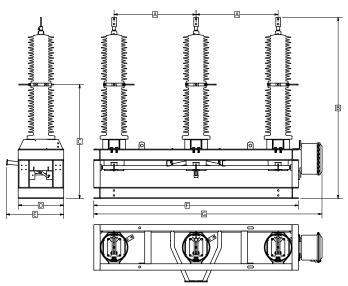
, 7, 8. Dimensions of TriSync capacitor switch All dimensions are inches (mm). Dimensions shown are approximate. See Table 3.
